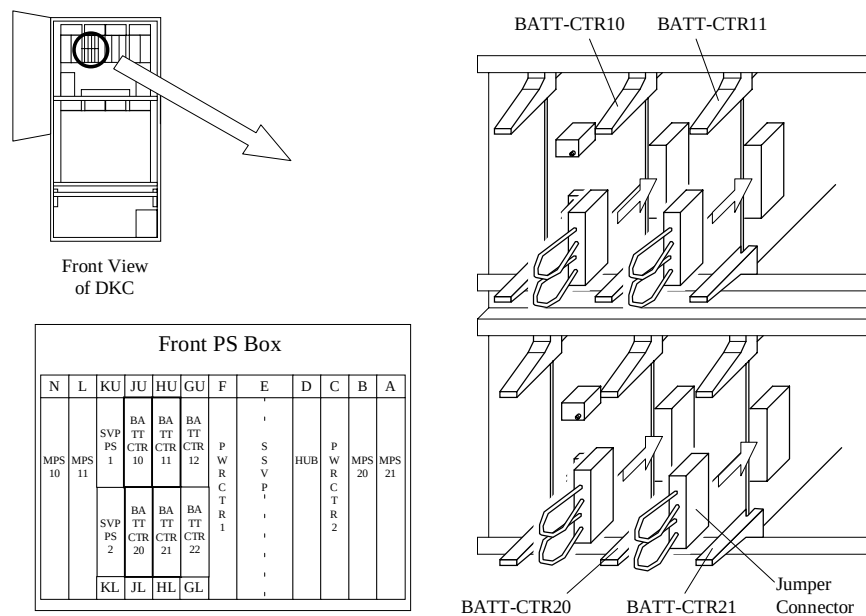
Installation of Jumper Connectors in BATT CTR PCB
